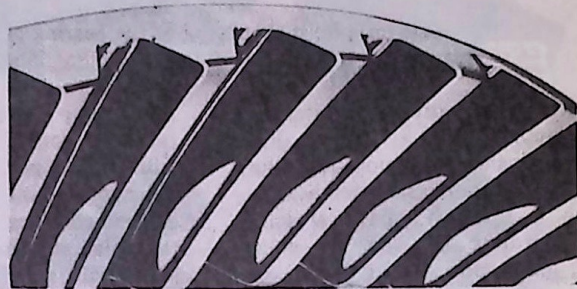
Typical Gear Tooth Contact Patterns—Dana
